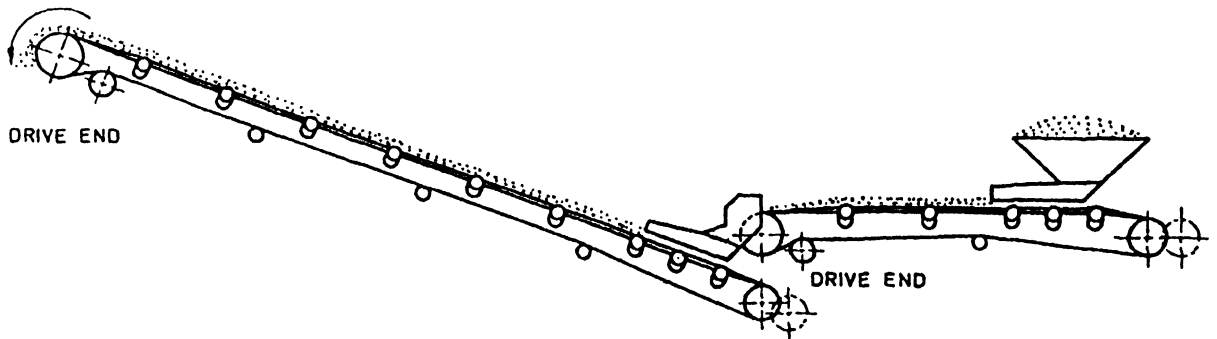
G This arrangement combining two conveyor units is often necessary where limited space and high belt tension make the sweeping curve impracticable
